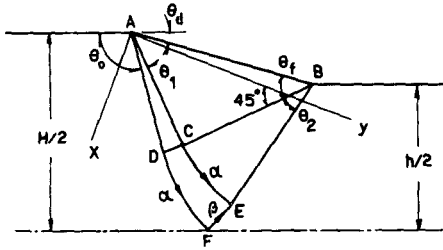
A Slipline field for strip drawing through a wedge-shaped die
